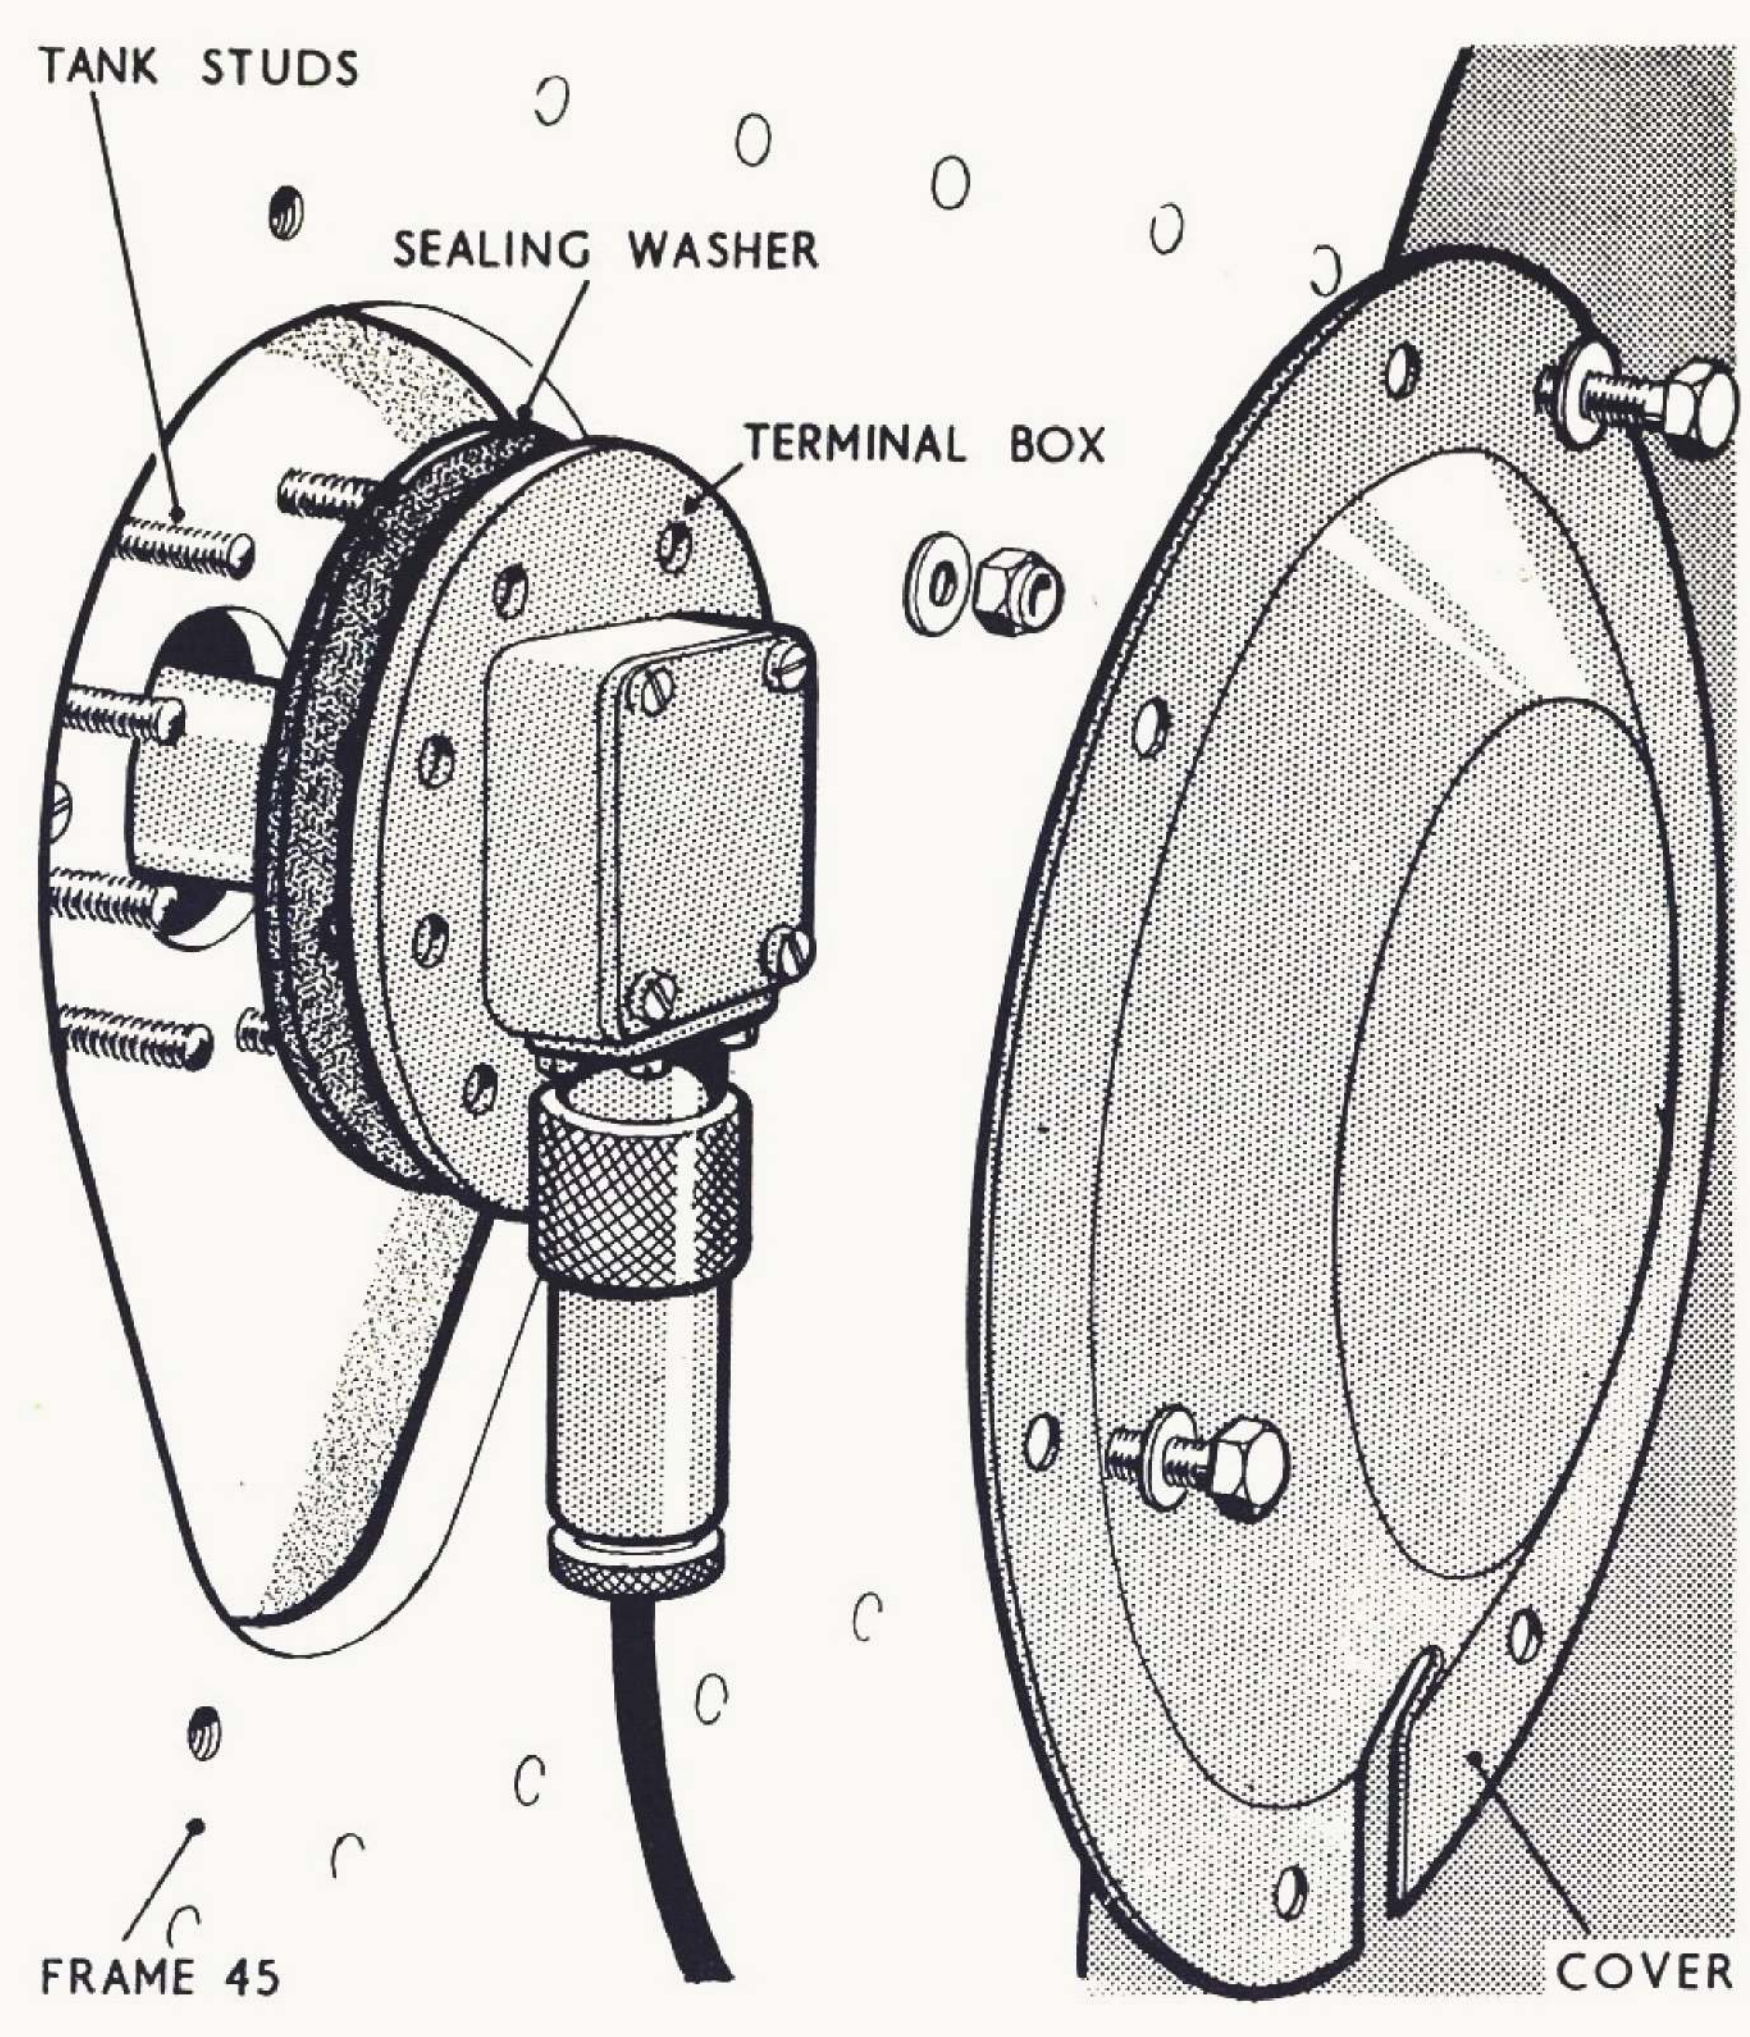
FUEL GAUGE TERMINAL BLOCK
